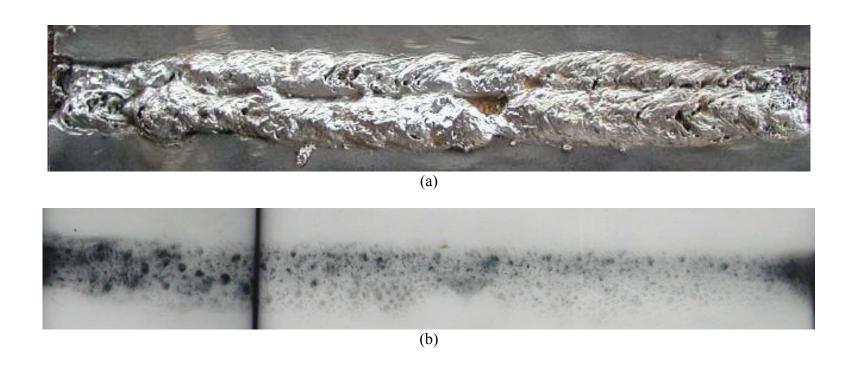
(a) V-groove wet weld deposited with E7024 electrode type on API 5L Gr. B steel at 100 m and (b) its radiographic image.
